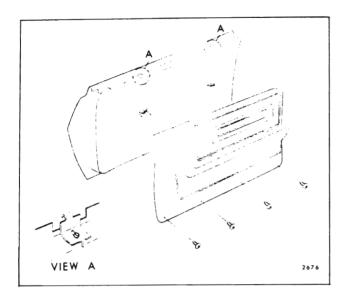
Door Trim Pad Assembly - Cadillac "E"
